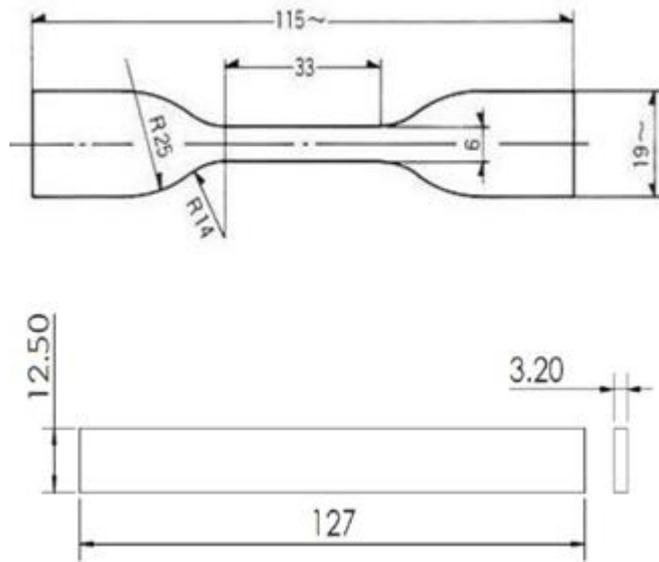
ASTM standard sample for Tensile and flexural testing (dimensions in mm)
